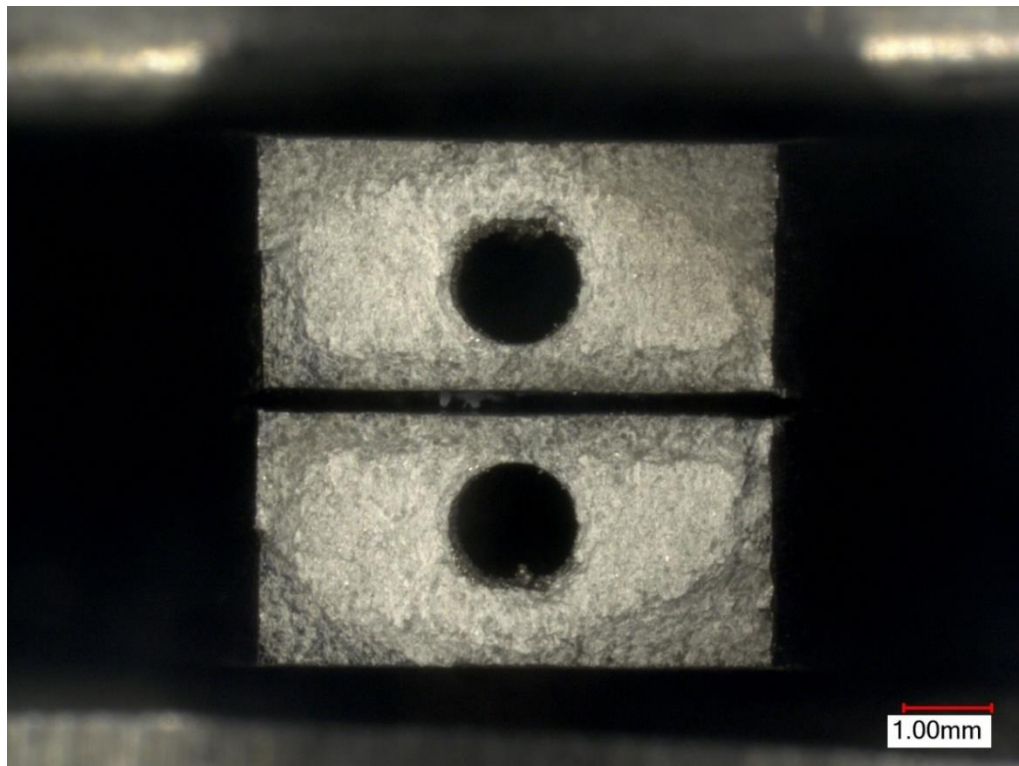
Specimen B2 fracture surface (1,000,000 cycles : 65.18 ksi / 449.4 MPa)
